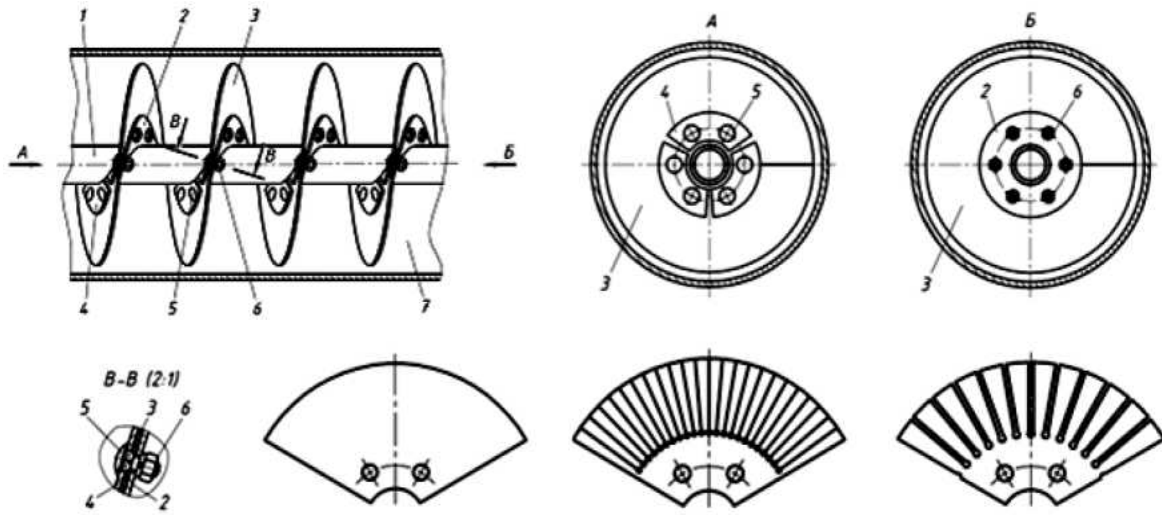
Auger conveyor with elastic screw blades and blades design options
